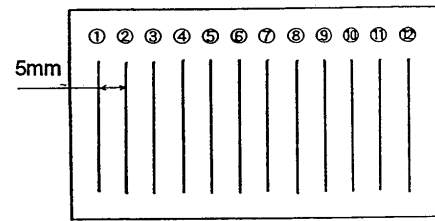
Schematic presentation of sample welded by YAG laser apparatus
